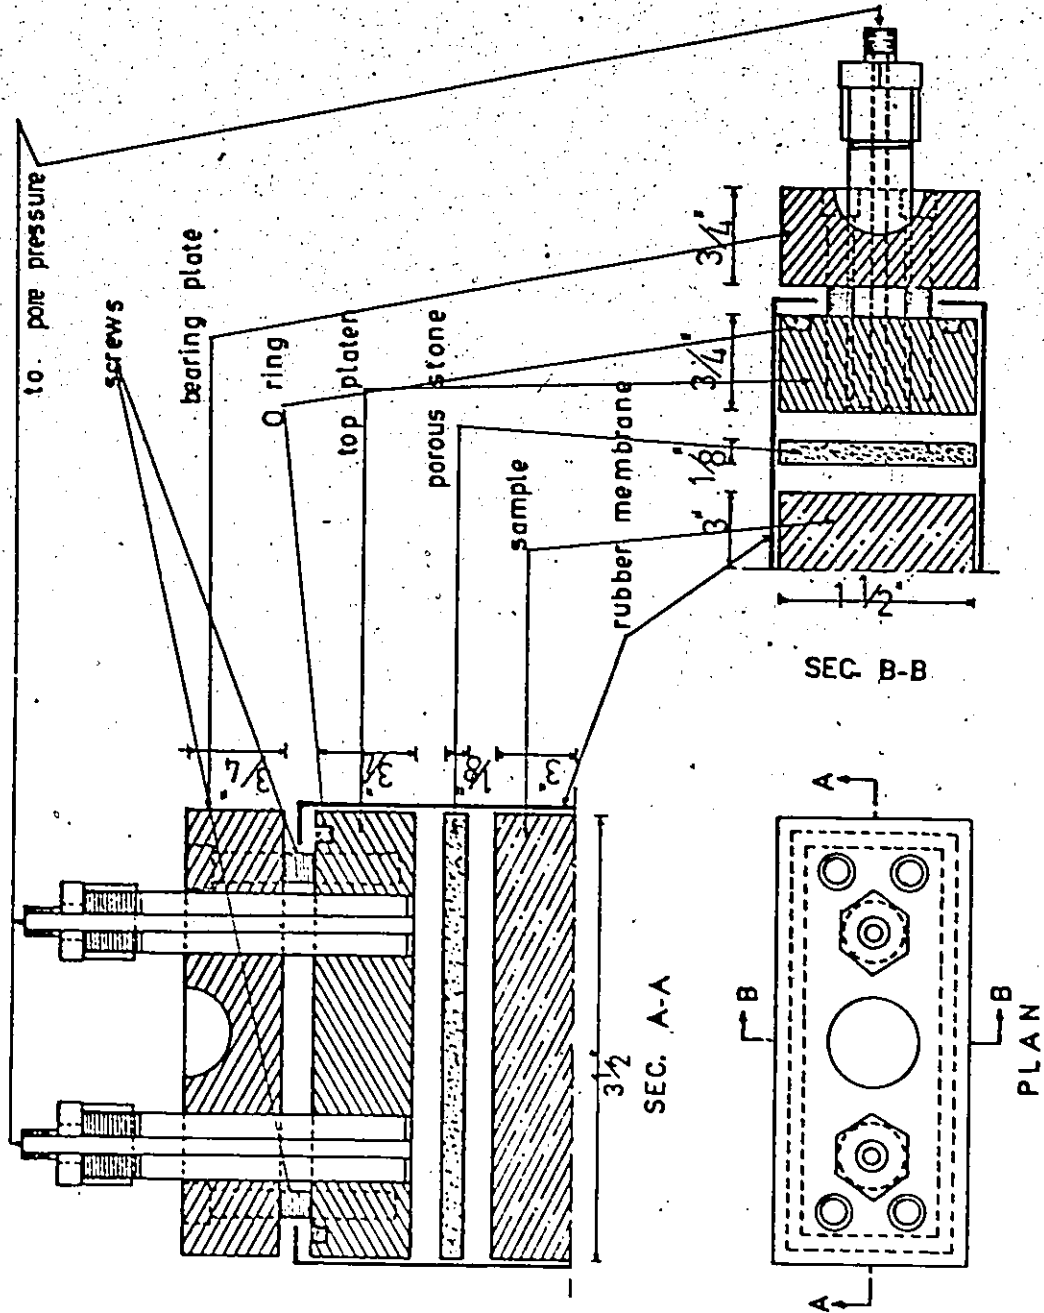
BEARING PLATE AND TOP PLATEN.
